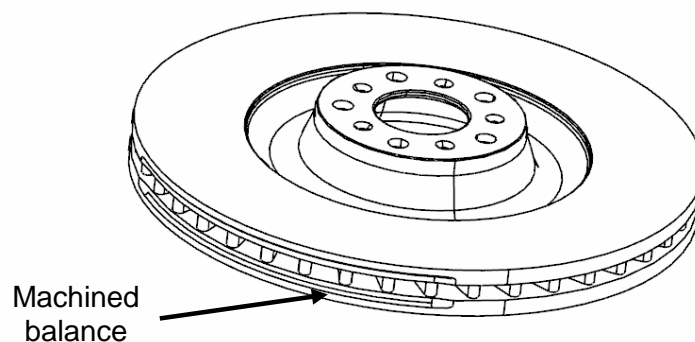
General image of the brake disc CAD model showing the machined balance
